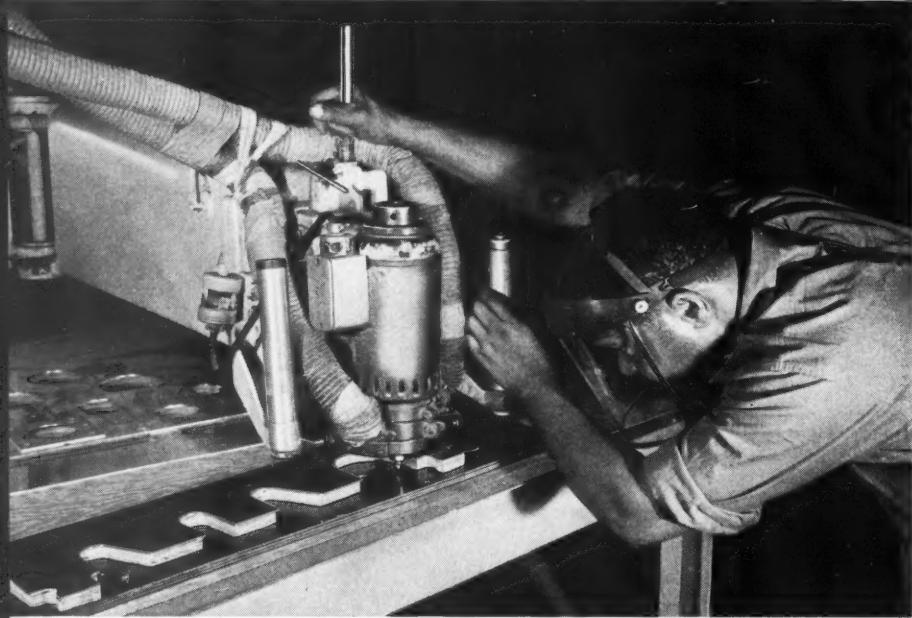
A template speeds the accurate contour cutting of a stack of laminated plastic sheets, and provides uniform, smooth edges.
